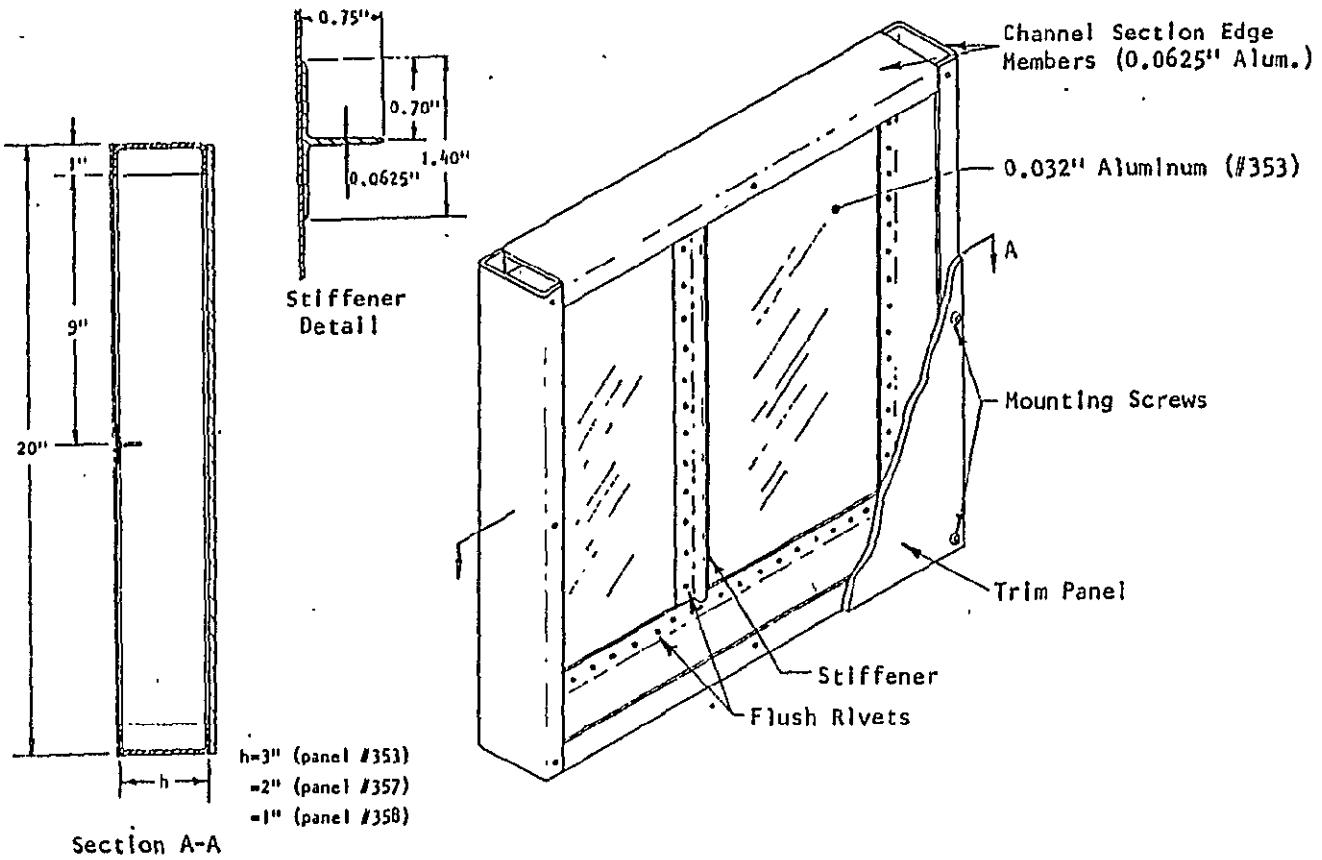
Details of Typical Skin Panels Tested: Group 1, Aluminum with 1 Stiffener
